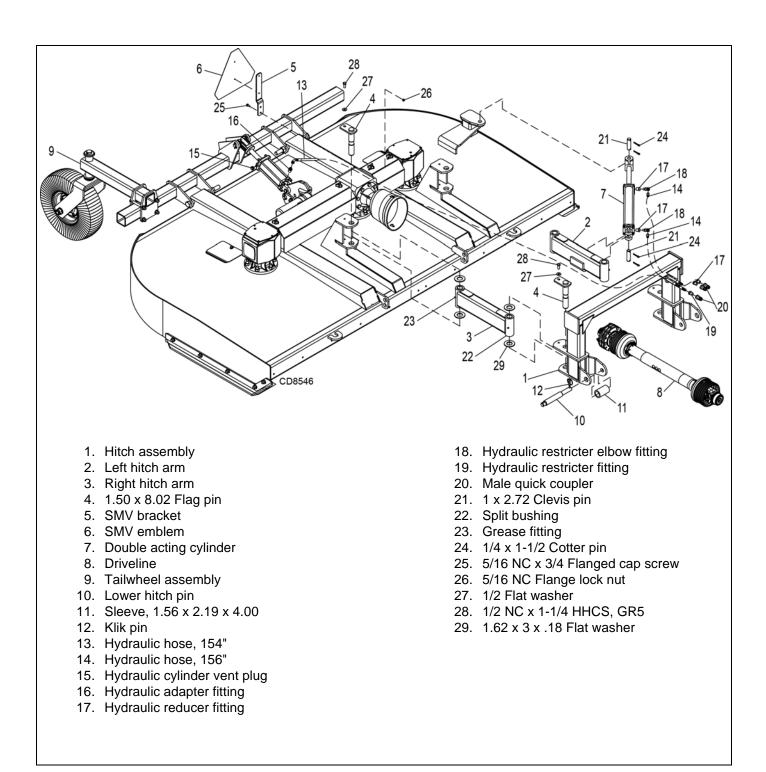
DSO8.50 & DSO10.50 3-Point Mounted Cutter Assembly
